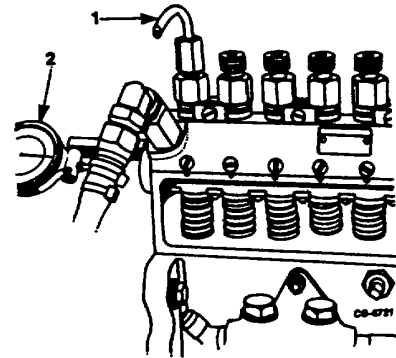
Checking Start of Delivery (No. 1 Pumping Element)
